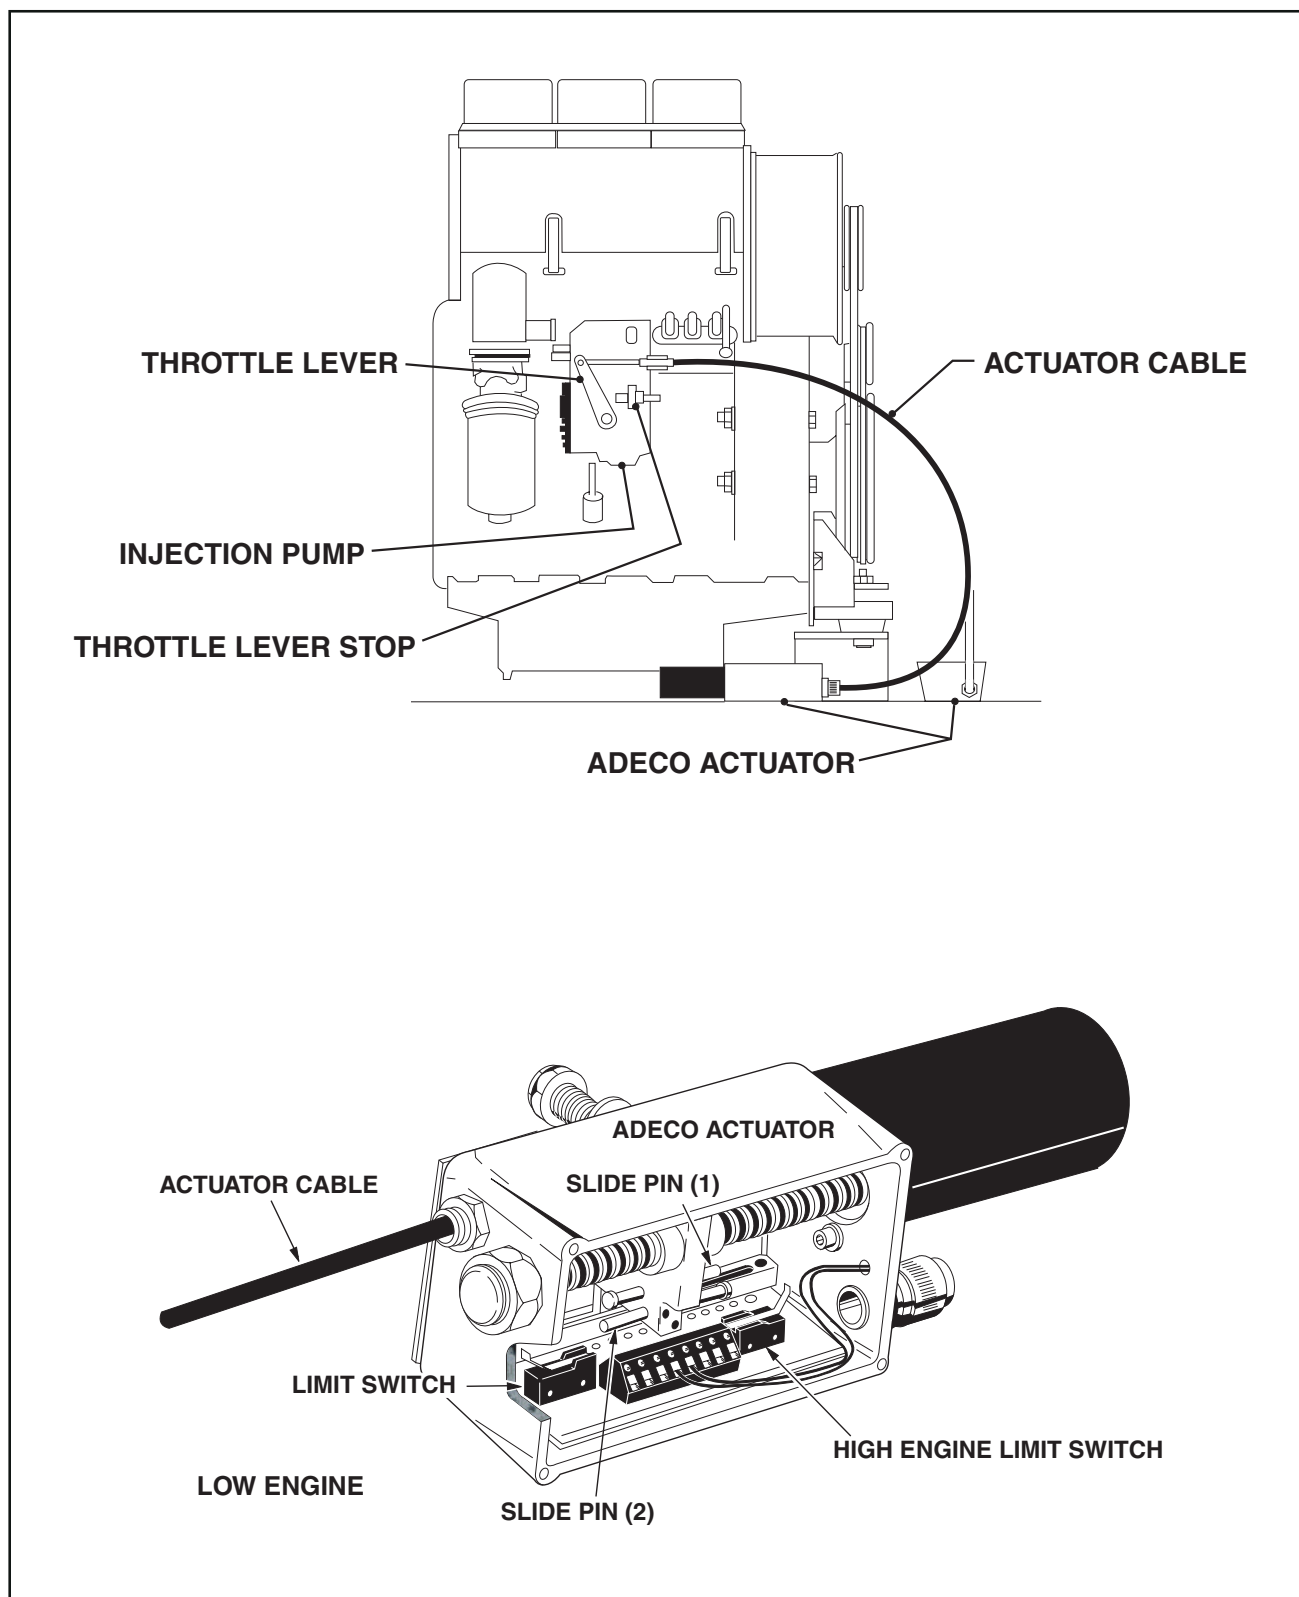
Throttle Checks and Adjustments - Deutz Engine
